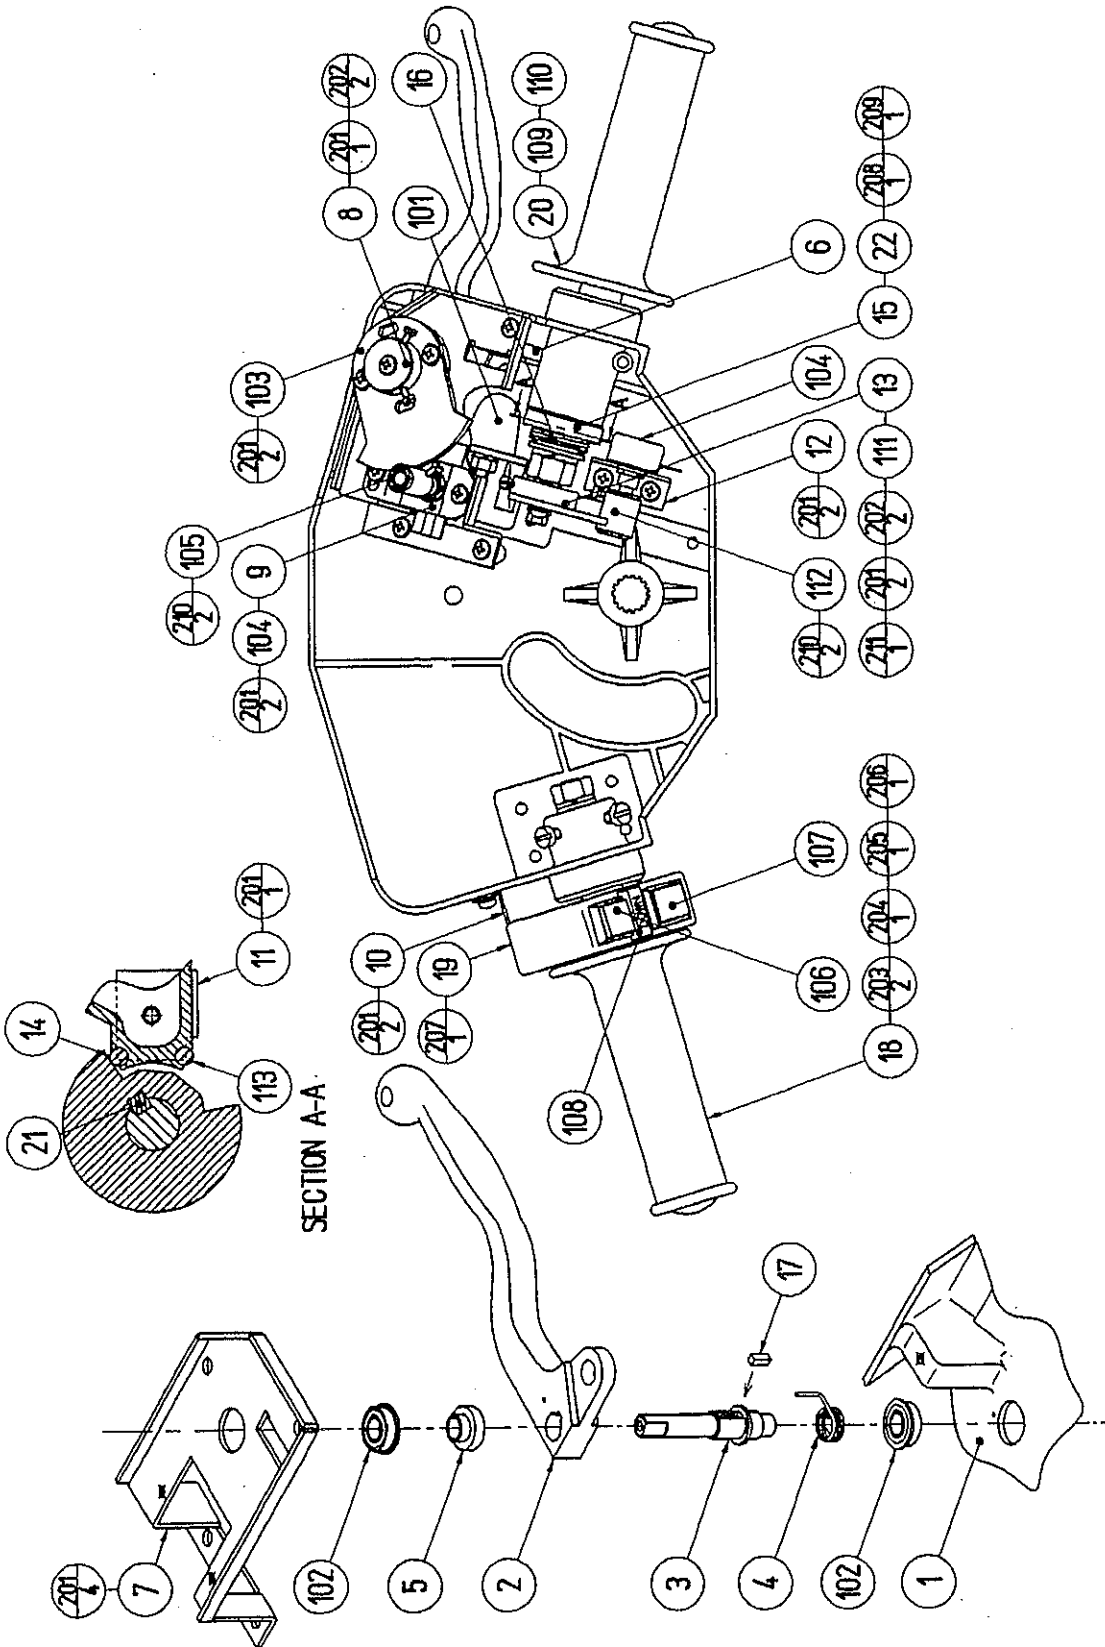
HANDLEBAR INTERNAL PARTS ASSEMBLY
